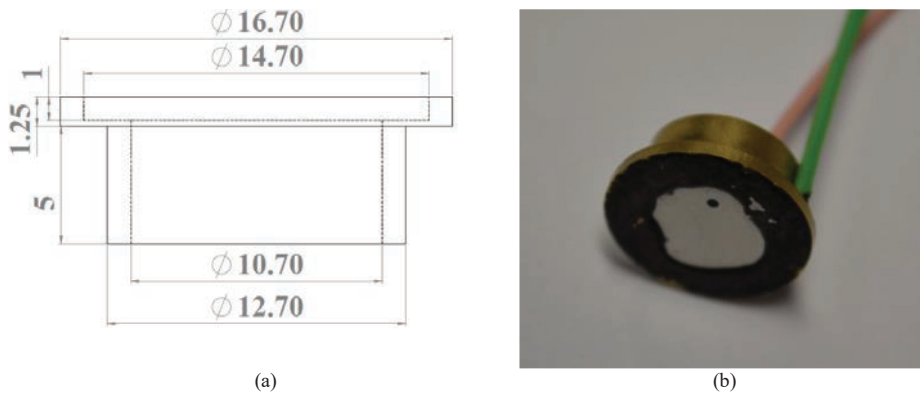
(a) The back-shell of the new prototype with dimensions in mm; (b) assembly of the PZT disc and the back-shell.
